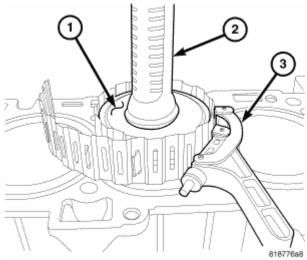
RING COMPRESSOR Courtesy of CHRYSLER LLC
